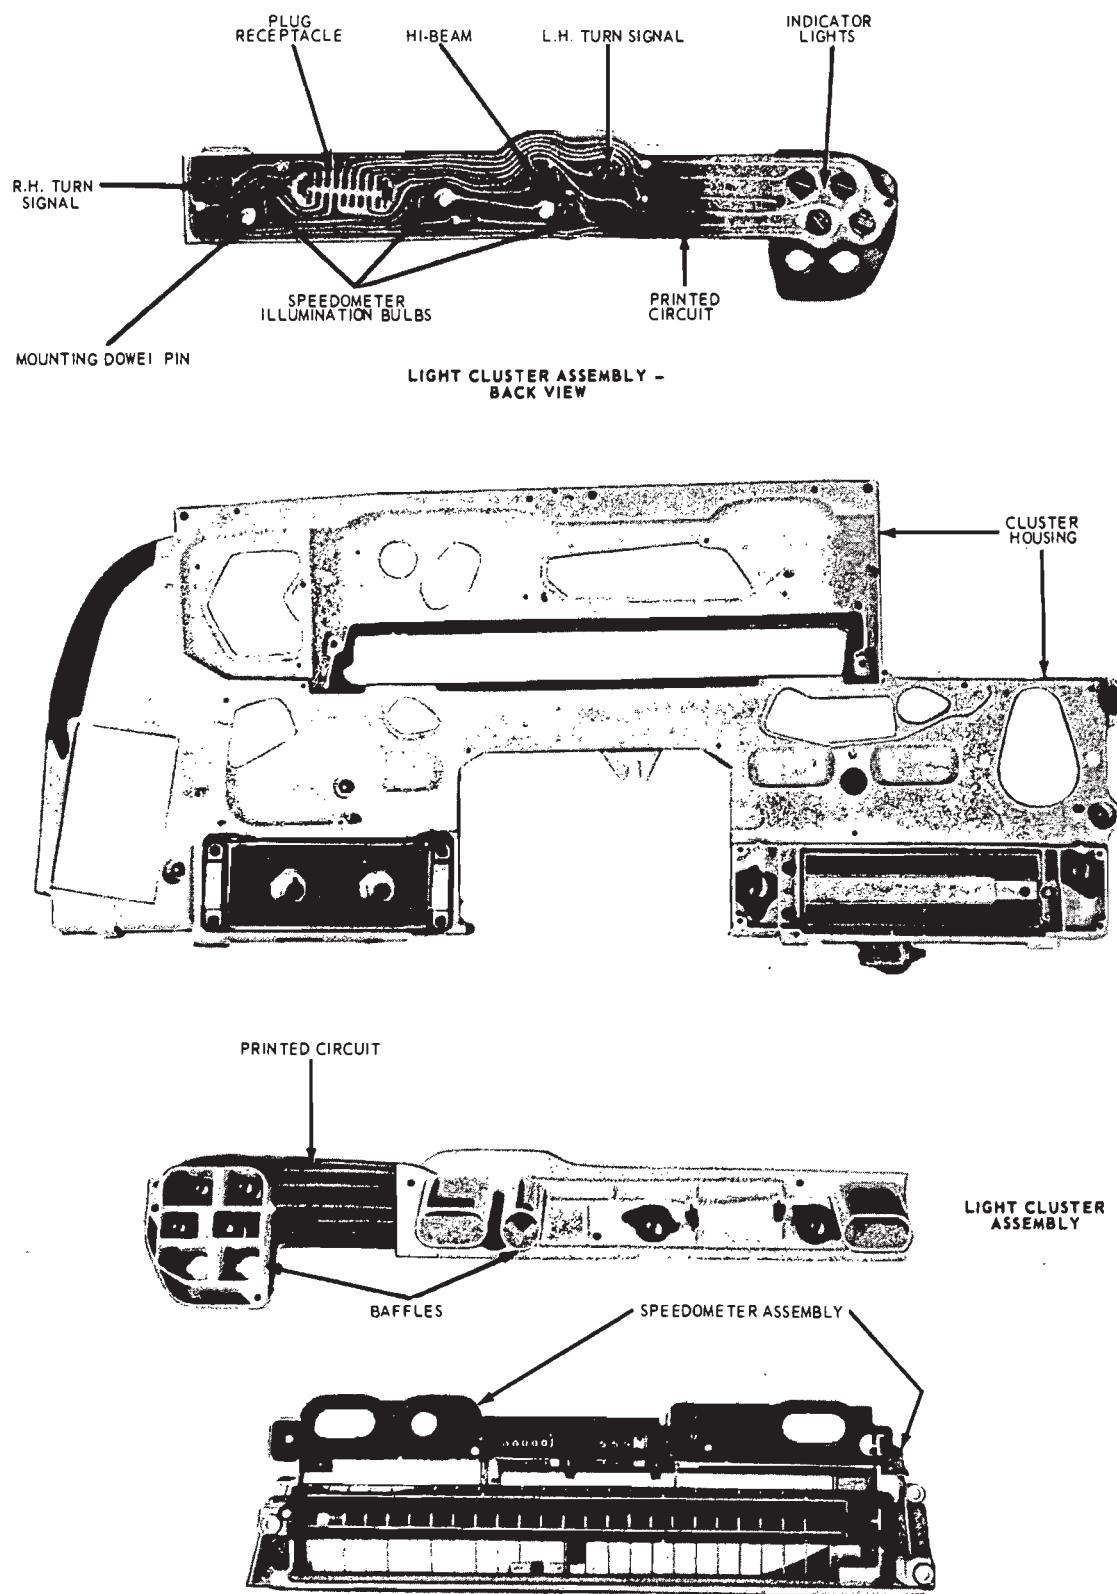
Disassembly of Lincoln Continental Cluster Housing
